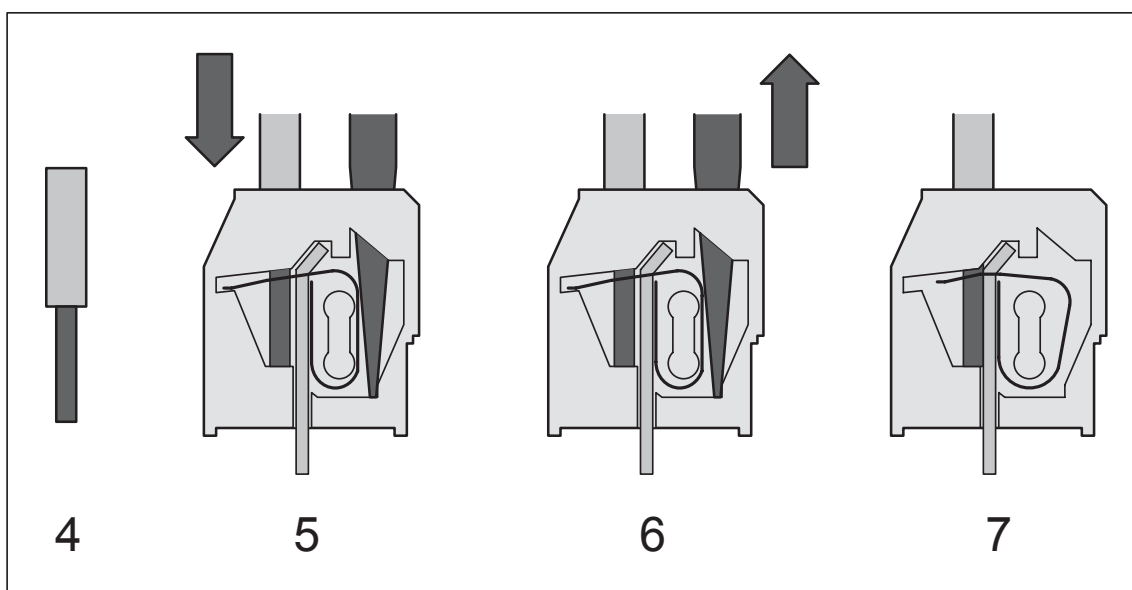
Connect the wire to the spring terminal (steps 4 to 7)
